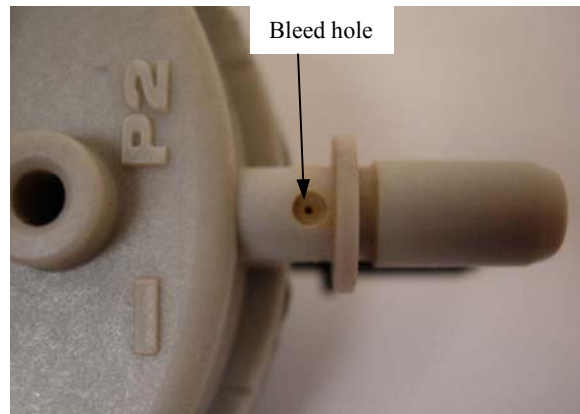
Close-up view of bleed hole on negative side of pressure switch.
